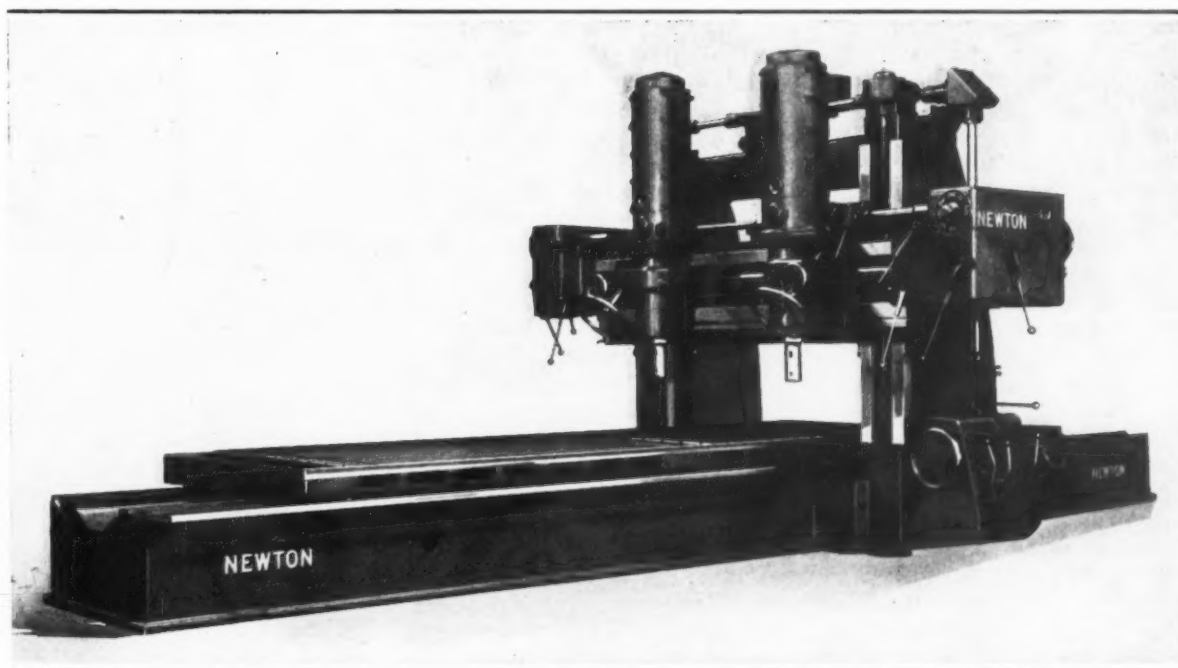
Newton Planer Type Machine for Accurately Locating, Drilling, and Boring Holes in Large Work
